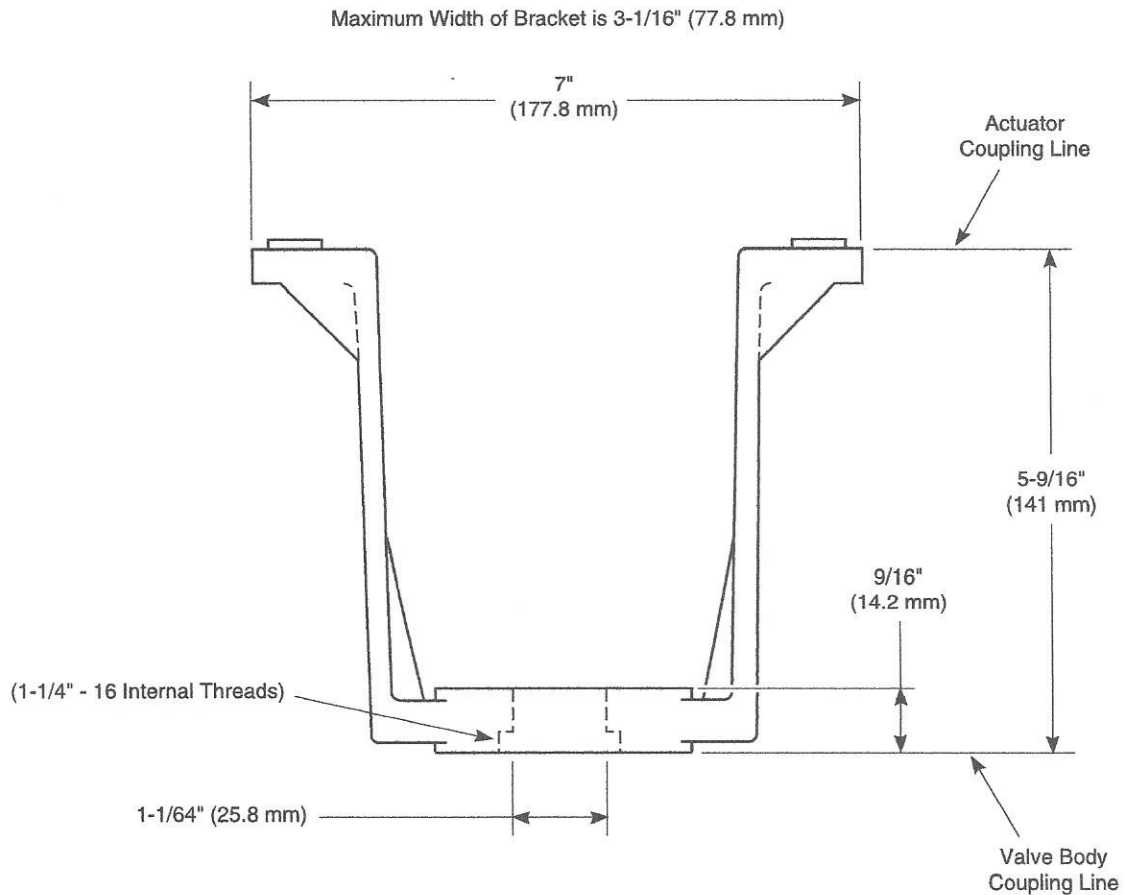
Dimensions of the Valve Linkage Mounting Bracket.
